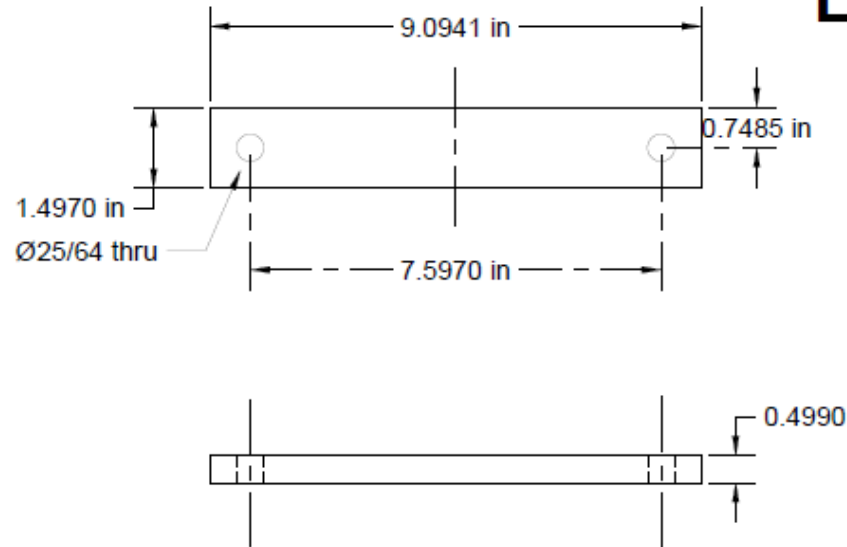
Shop drawings for cracking frame parts 8:9
